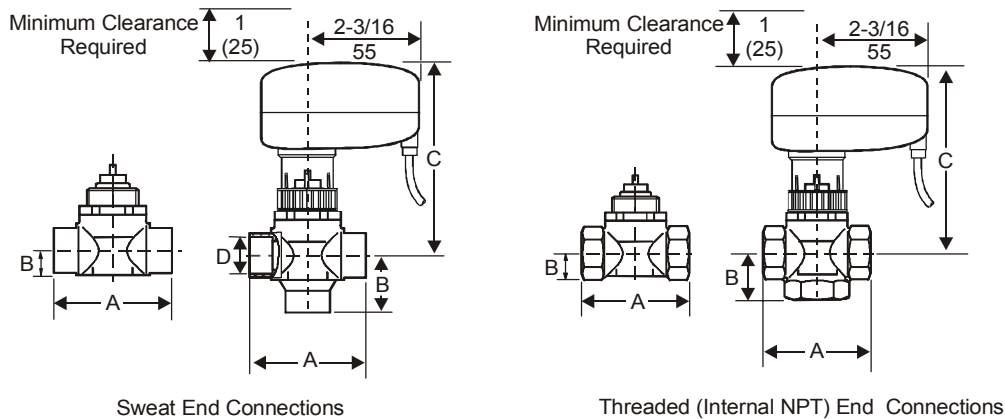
VA-7450 Actuated VG4000 Series Valve Dimensions, in. (mm)
